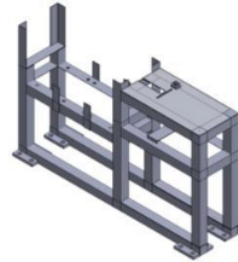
Hollow iron profile frame with welded assembly.
